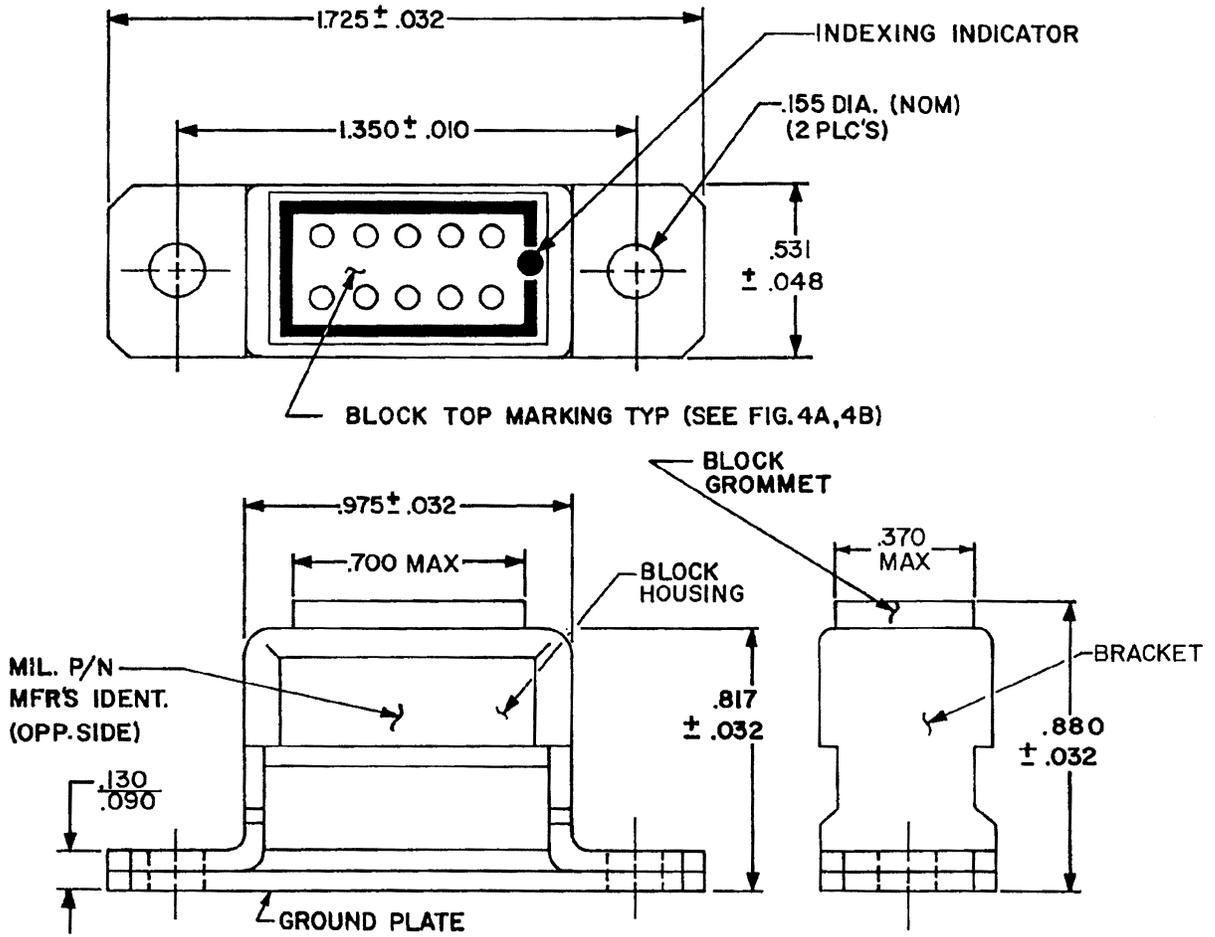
MOUNTING BRACKET HOUSING ONE BLOCK, SIZE 16.
